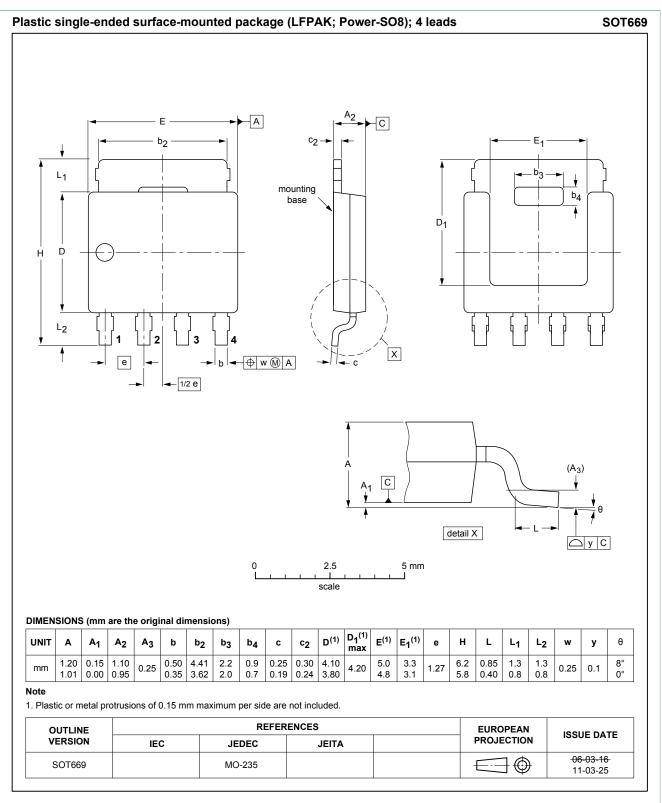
Package outline LFPAK; Power-SO8 (SOT669)
